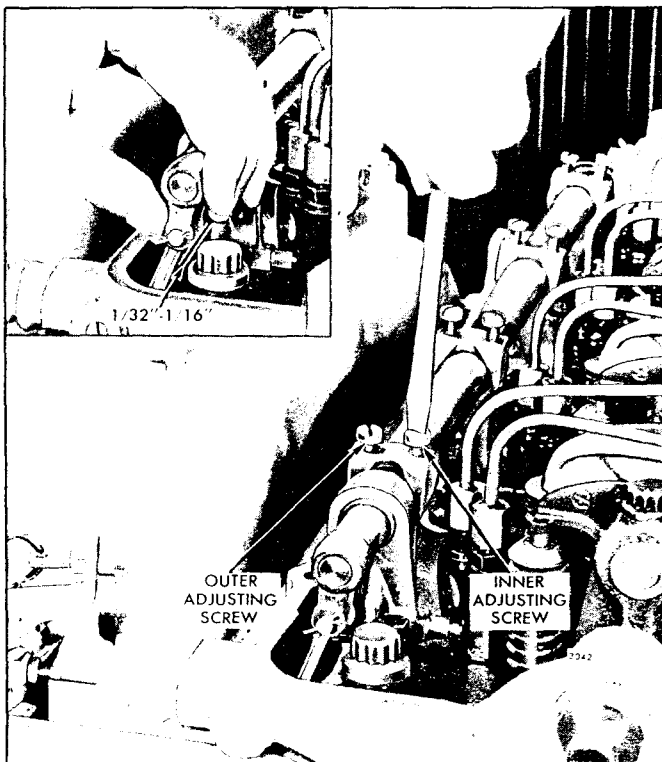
Adjusting Injector Rack Control Lever Adjusting Screws
